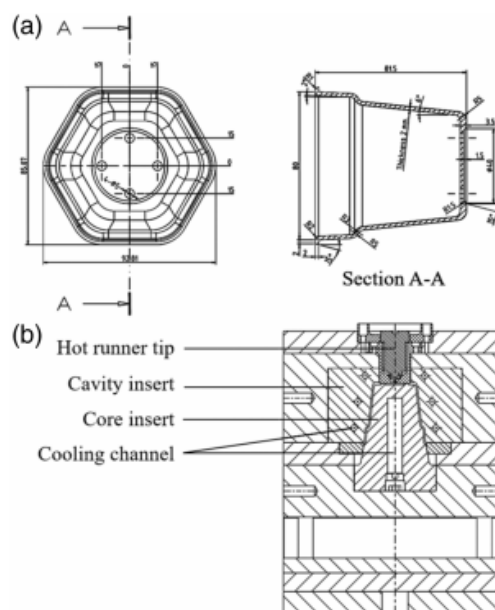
Product design of hexagon plant-pot (a) and 2D hot runner mold structure design (b)
